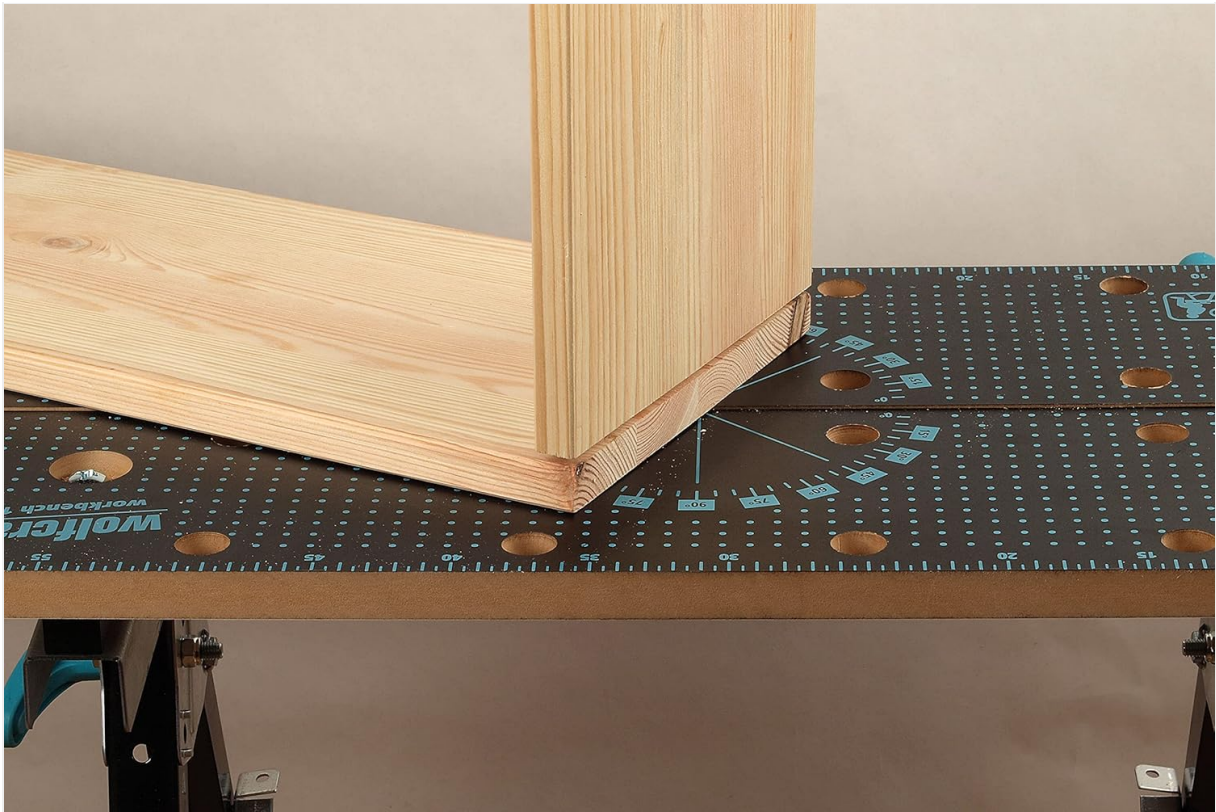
A completed corner joint, demonstrating a strong and flush connection achieved with dowel pins. For corner connections, drill holes into the end grain of one board and into the face of the other, similar to a T-butt joint but at the corner. Ensure precise alignment for a flush finish. Apply glue and clamp until dry.
